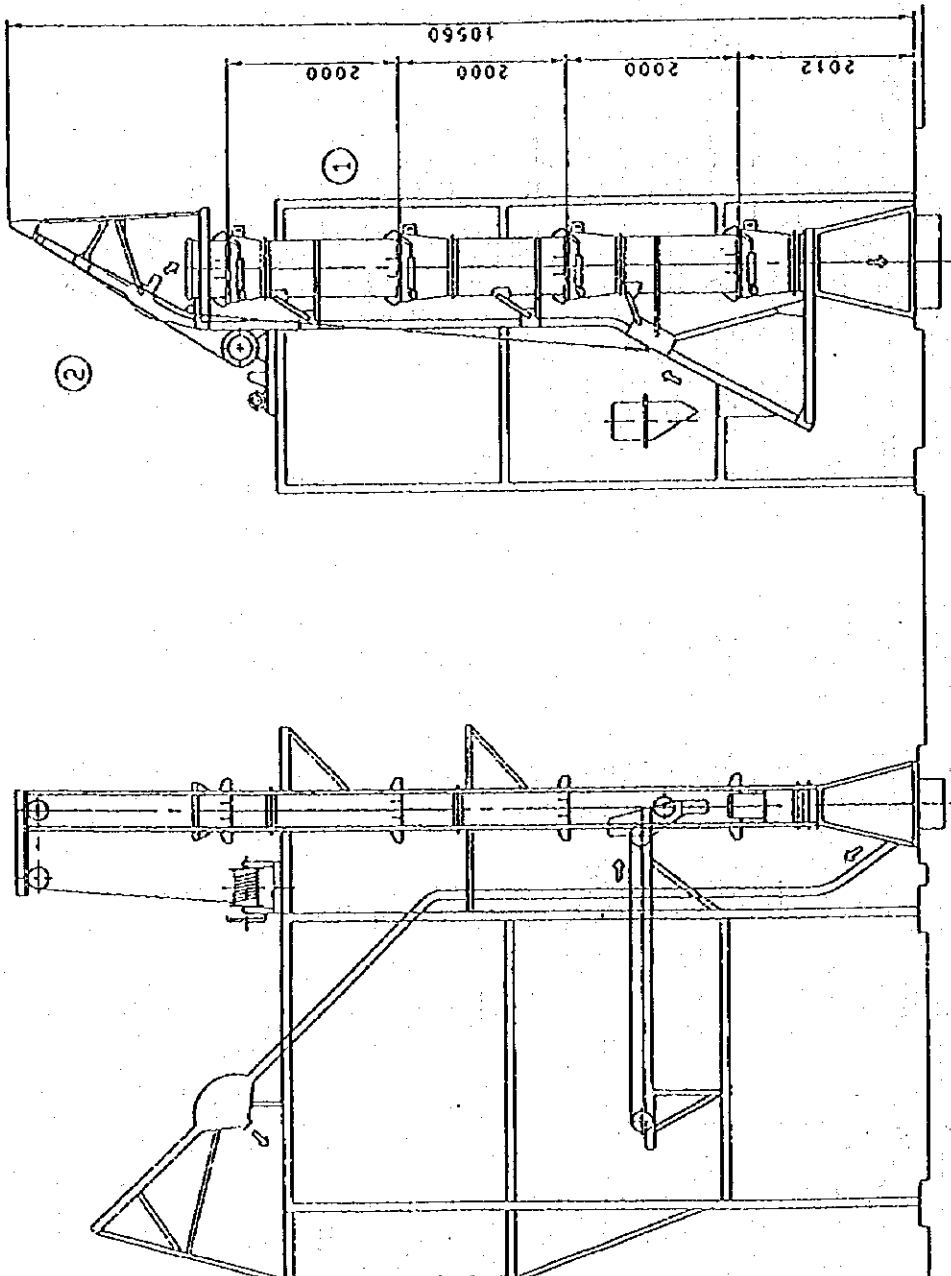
Typical drawing of shutter tester and skip elevator
